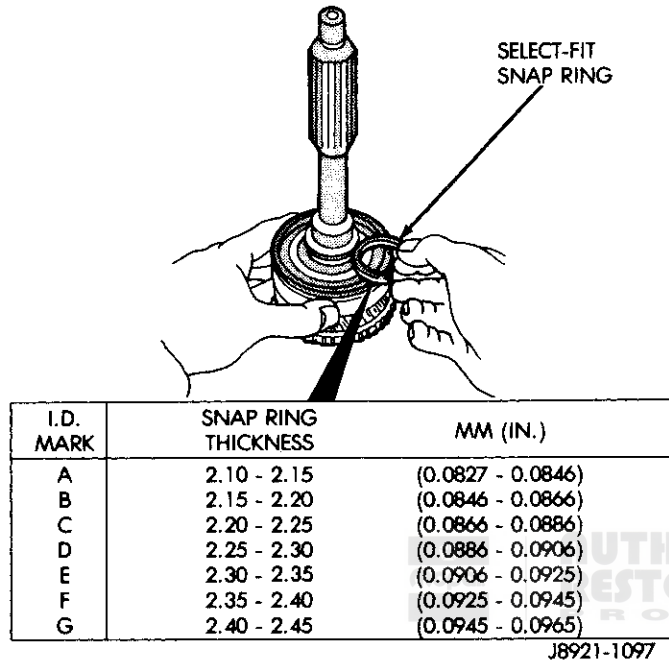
Selecting Input Shaft Front Bearing Snap Ring
